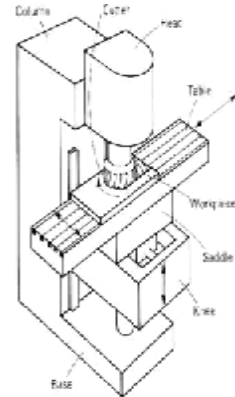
Principal components of a vertical-candle knee-and-column milling machine
